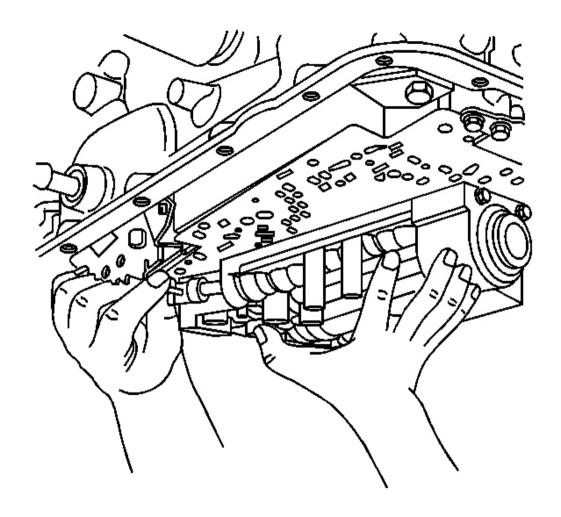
View Of Valve Body To The Transmission Case Courtesy of GENERAL MOTORS CORP.
